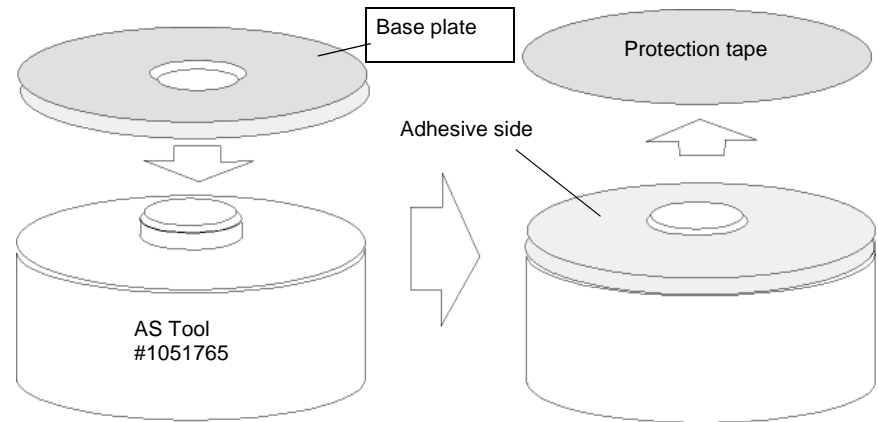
Setting the Base plate on the AS Tool # 1051765
